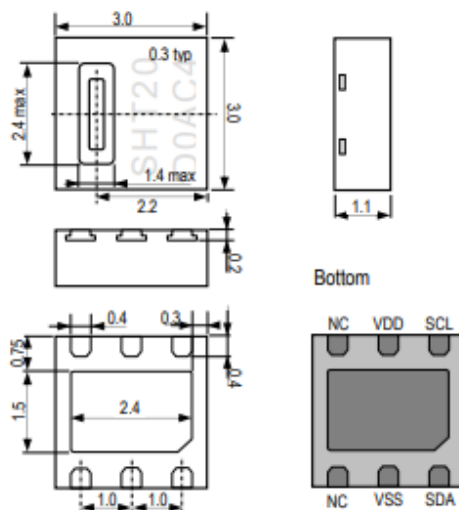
Drawing of SHT20 sensor package, dimensions are given in mm (1 mm = 0.039 inch), tolerances are ± 0.1 mm. The die pad (center pad) is internally connected to VSS. The NC pads must be left floating. VSS = GND, SDA = DATA. Numbering of E/I pads starts at lower right corner (indicated by notch in die pad) and goes clockwise (compare Table 2).
